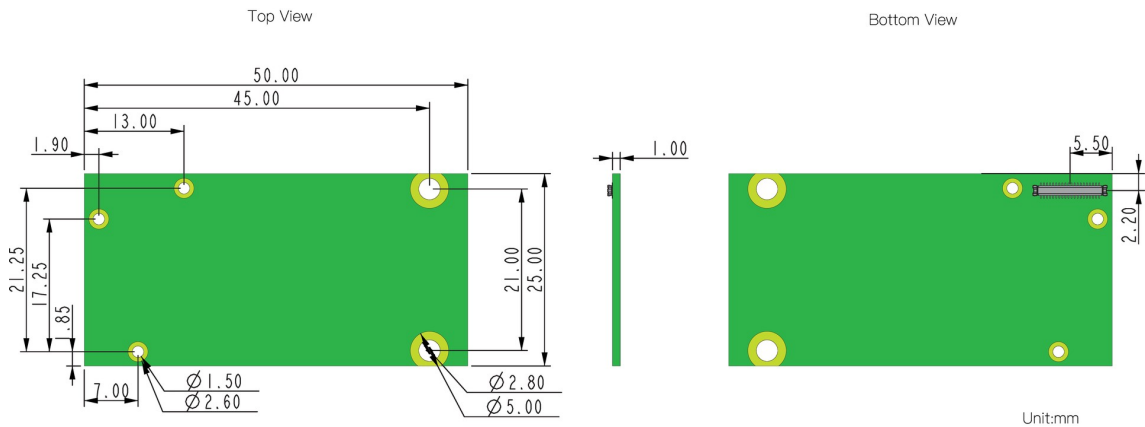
RAK12037 WisBlock Sensor mechanical drawing
